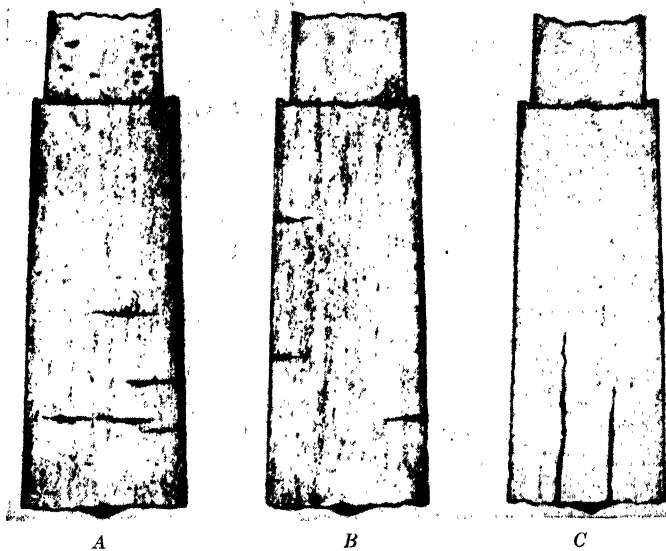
VII.—A, transverse cracks; B, corner cracks; C, vertical cracks. (Courtesy of C. R. Lynch.)
